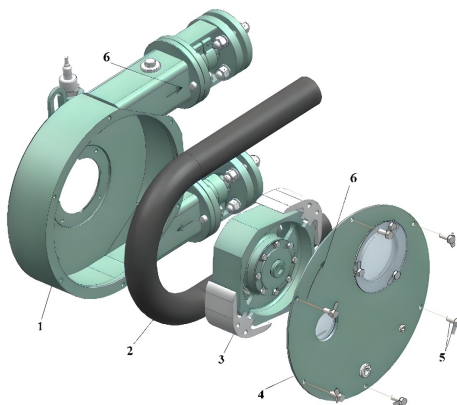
Peristaltic pump: 1- housing, 2- hose, 3- squeezing element, 4- housing cover, 5- bolted connection elements (bolt, locking washer), 6- direction of transportation
